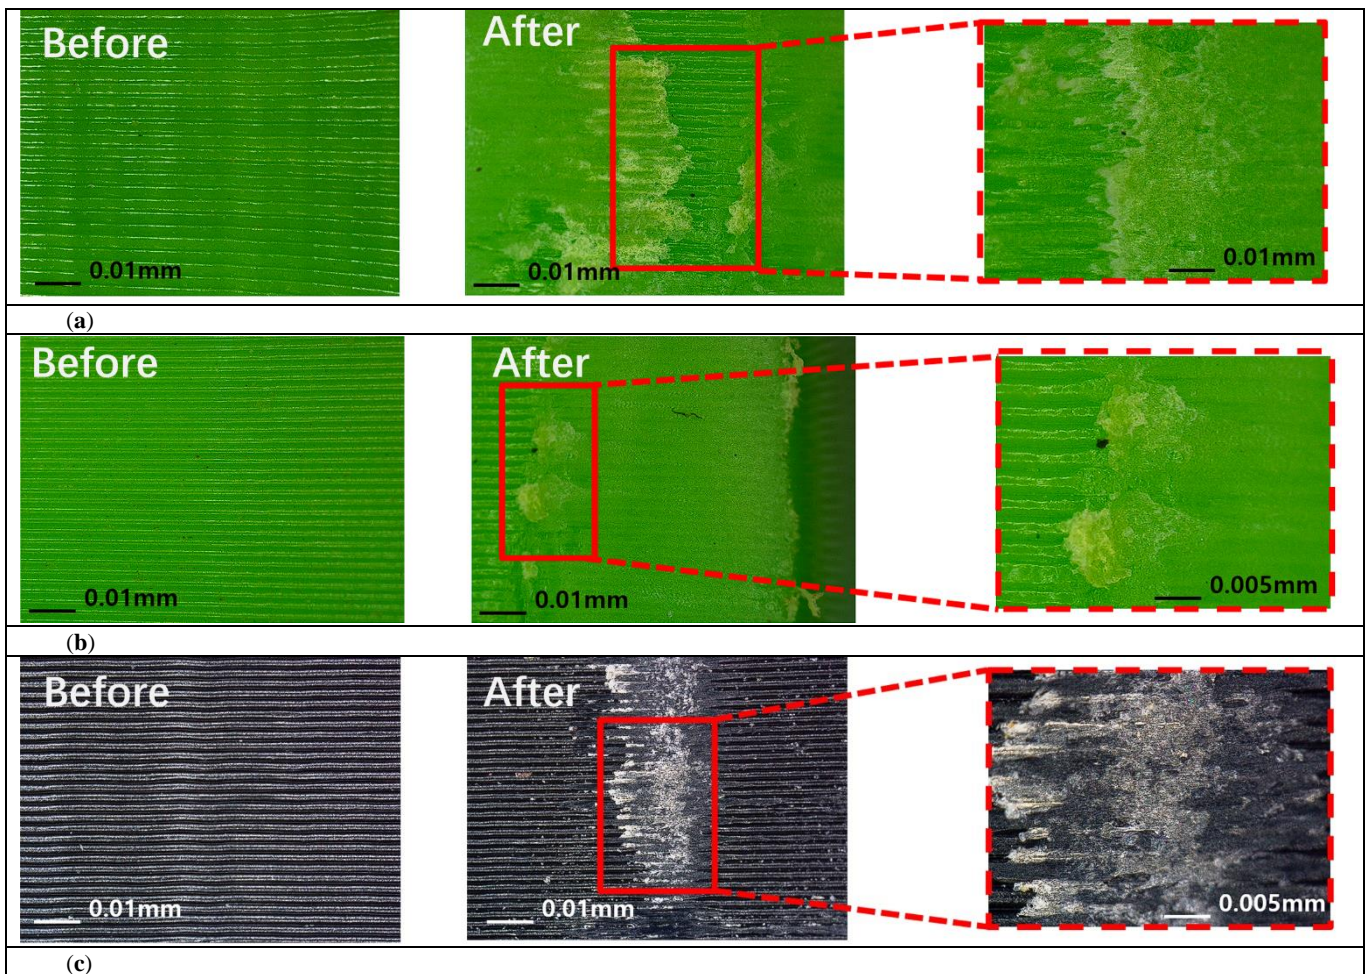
Surface wear of three gears a. PLA+PLA gears surface; b. PLA+TPU gears surface; c. Tough-PLA+PLA gears surface
